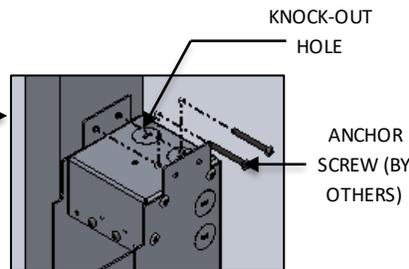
DETAIL SHOWING KNOCK-OUT HOLE AND SCREWS
